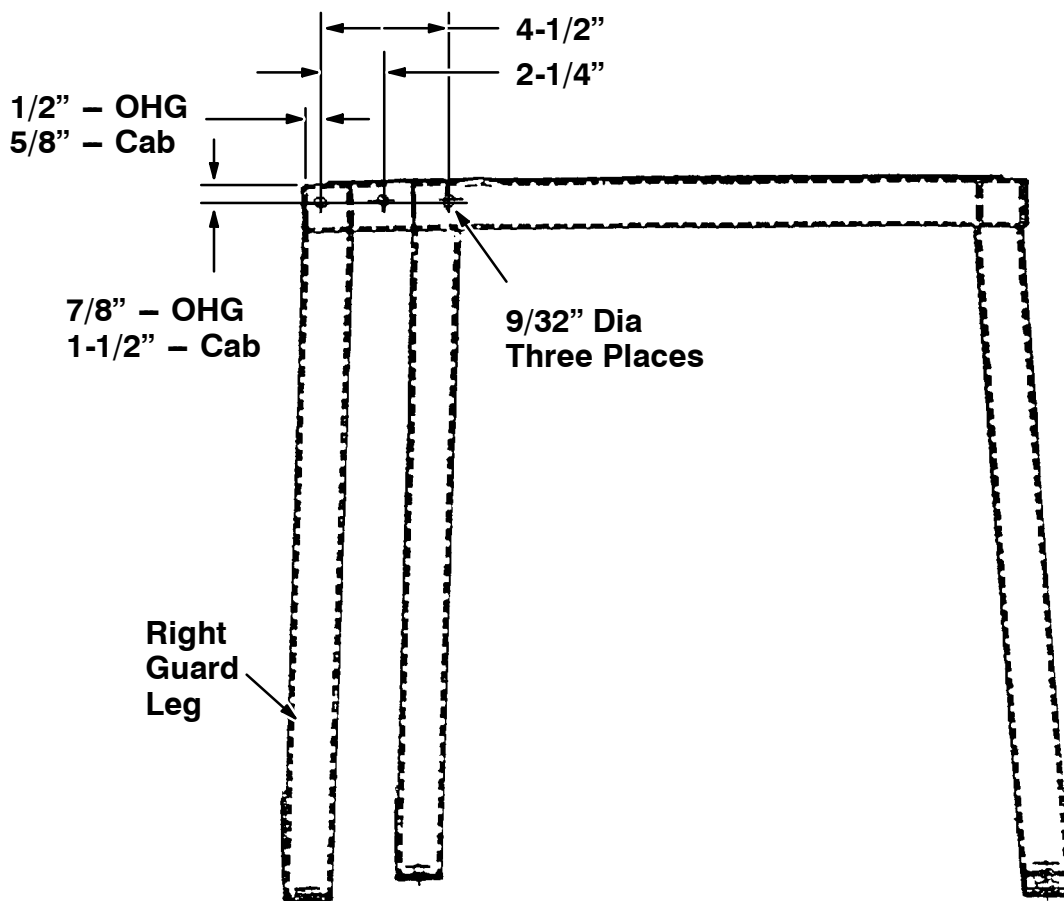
Hole Locations in Cab and Overhead Guard Frame
